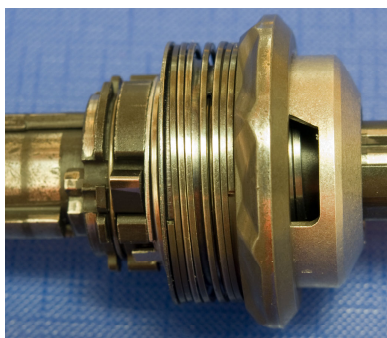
correctly assembled shifting cam and feed cam. Note the hole in the feed cam.
